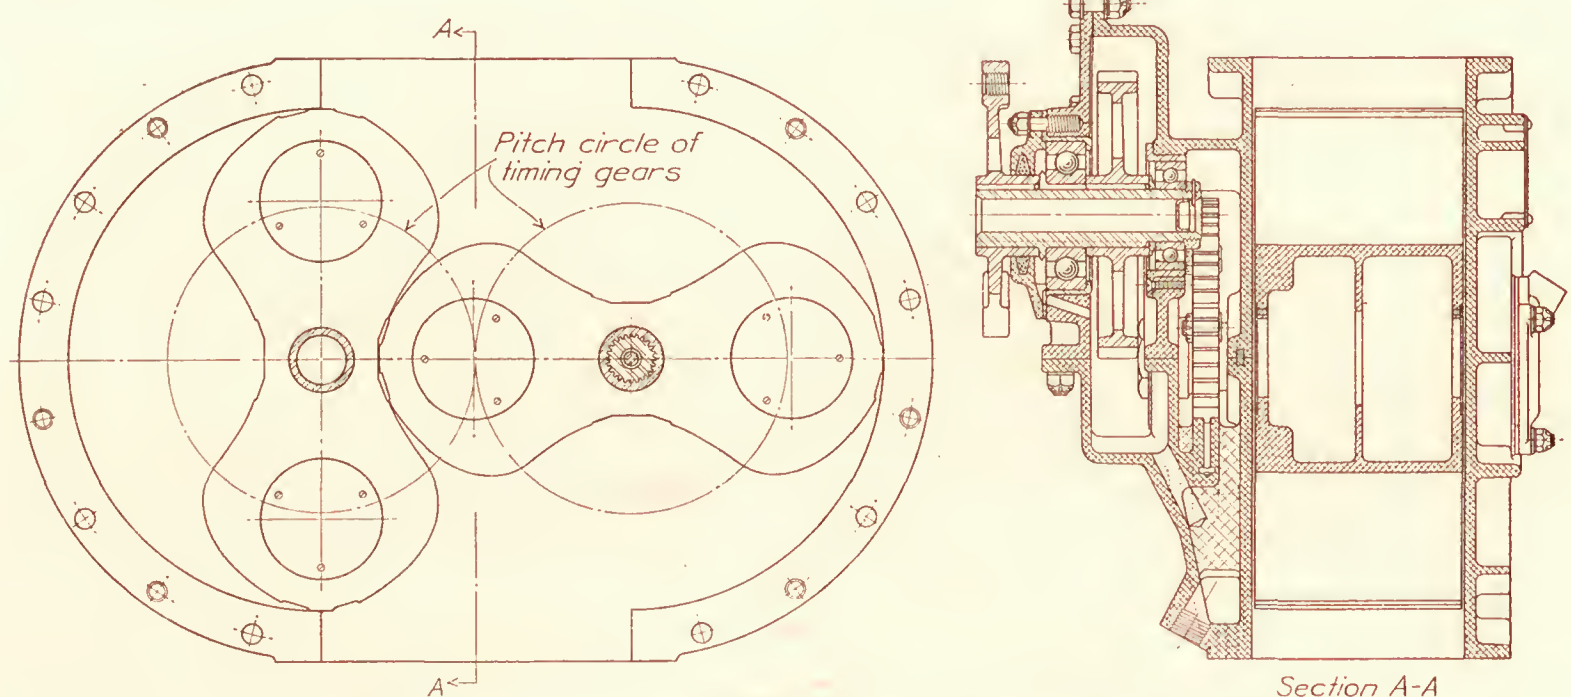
N. A. C. A. Roots type supercharger with gear end plate removed and supercharger cross section showing 4-inch impellers
